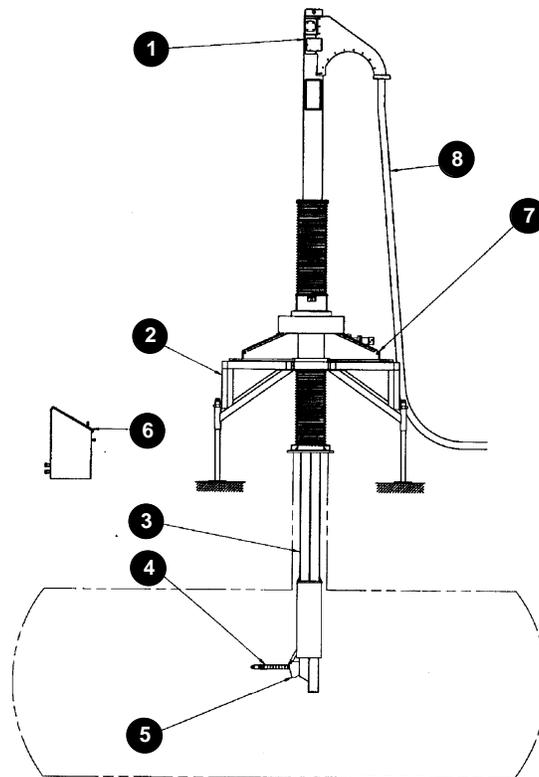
Borehole Miner extendible nozzle slicing system. Legend: (1) top mast assembly, (2) platform assembly, (3) bottom mast assembly, (4) arm assembly, (5) launch assembly, (6) control console, (7) bridge mount, (8) containment hose assembly. *Source:* Bamberger and Boris 1999.
